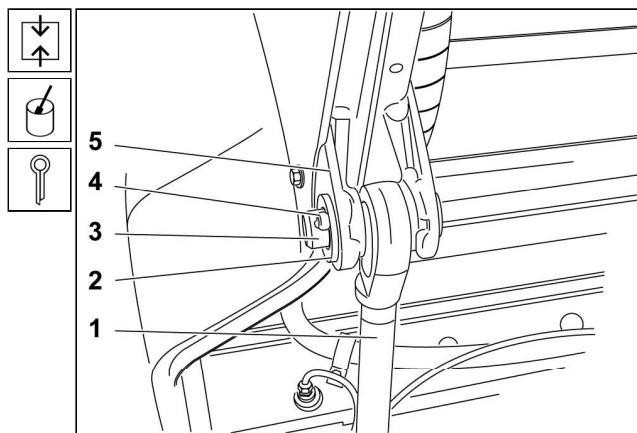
Mounting of hydraulic cylinder on cab - installation
